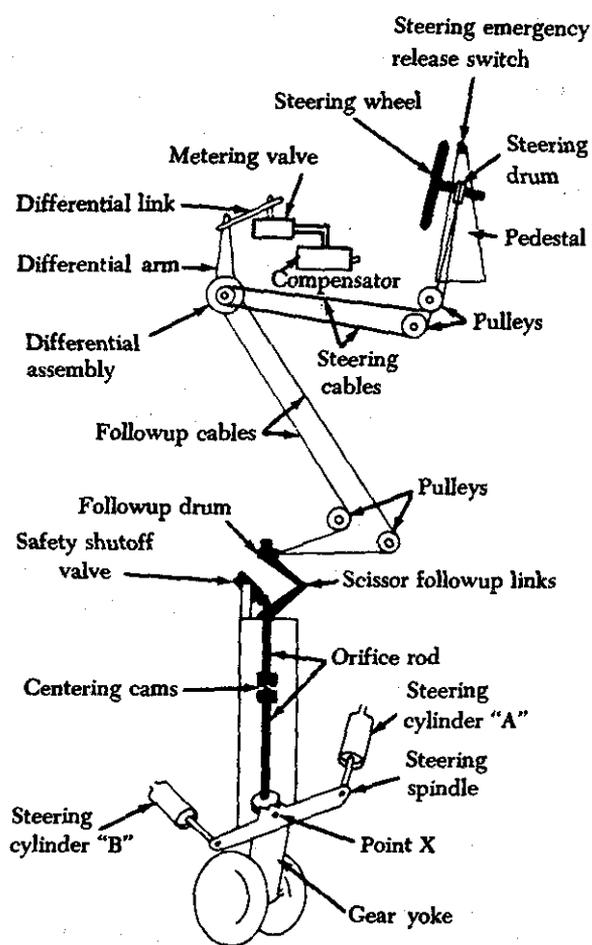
Nosewheel system mechanical and hydraulic units.
